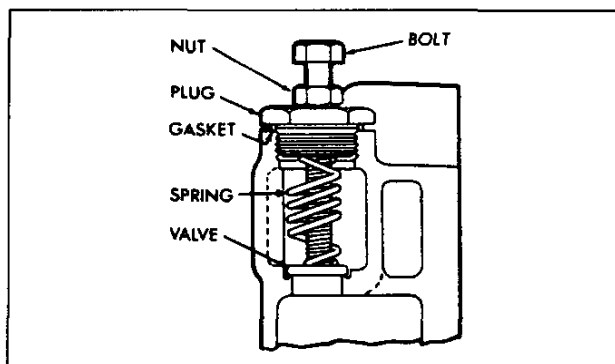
Bypass Valve with Modified Valve Plug Installed
